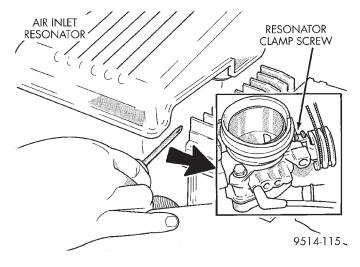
Air Inlet Resonator Attachment to Throttle Body
